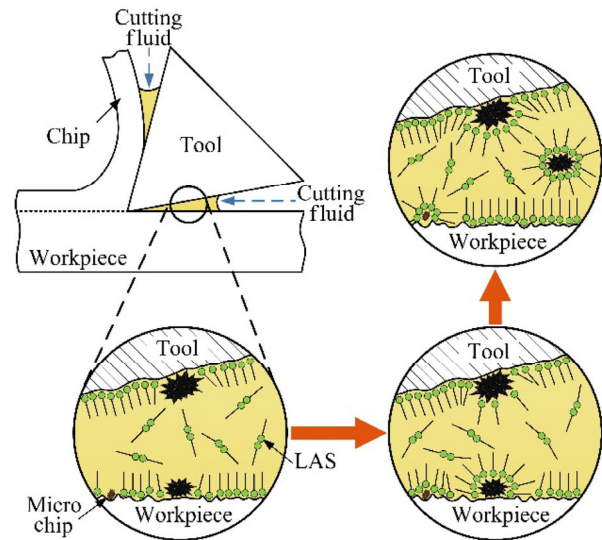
Cleaning mechanism of micro-cutting chips on the cutting edge of broaching tool.
